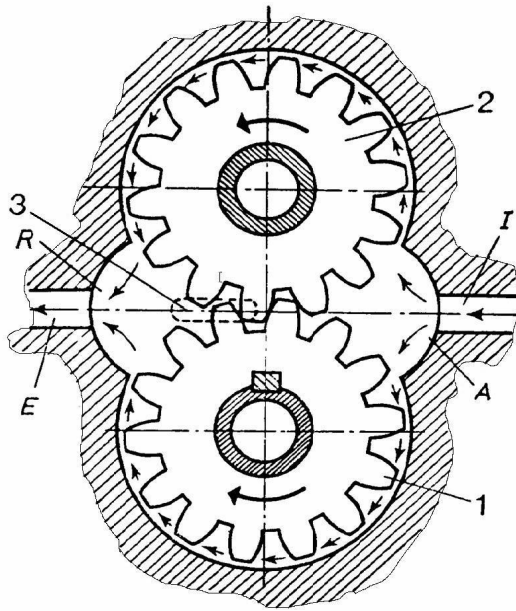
Sketch of the external oil gear : 1- leading gear ; 2-led gear ; 3-lathing ; A-suction space; R- discharge space
